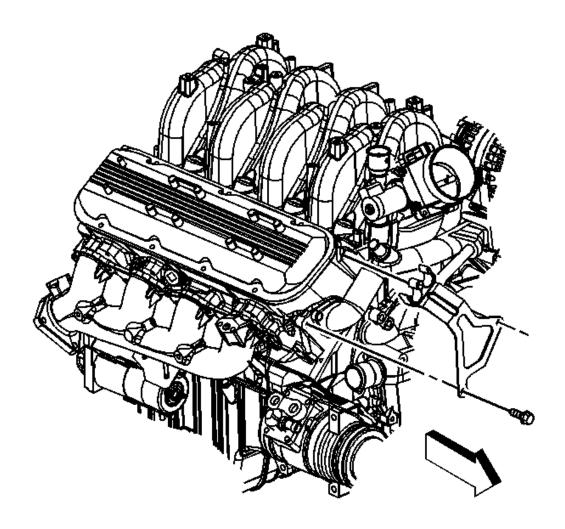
View Of Heater Hose Bracket & Bolts Courtesy of GENERAL MOTORS CORP.
